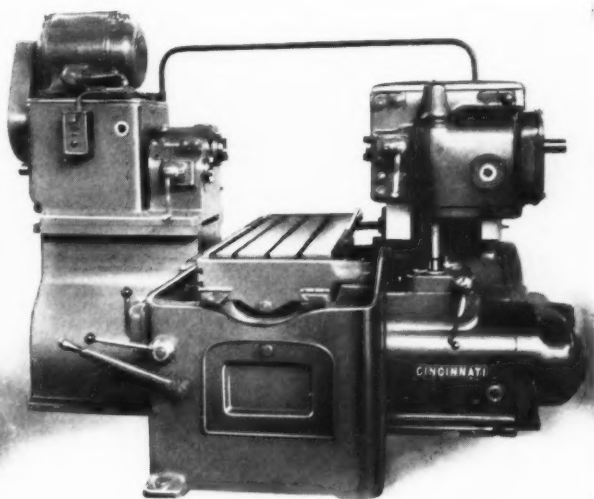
(Below) Machine in Fig. 3 Rebuilt and Rearranged for Milling Both Ends of Cylinder Blocks
